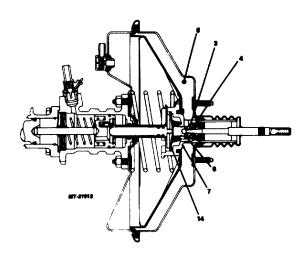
DPB Booster Vacuum Booster in Holding Position.
